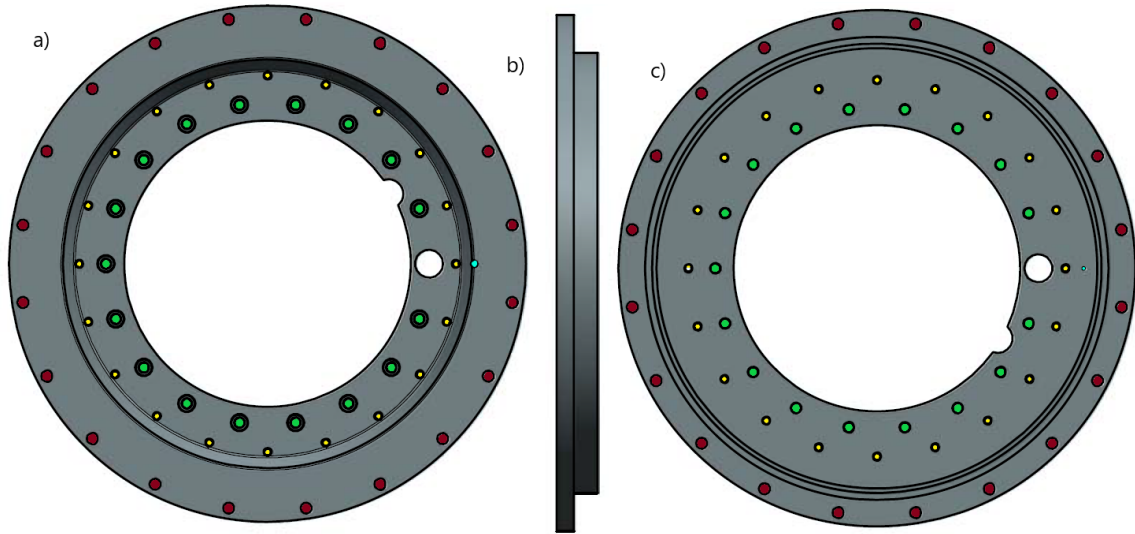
Radial RDE Top Plate. (a) Top View, (b) Side View, and (c) Bottom View.
